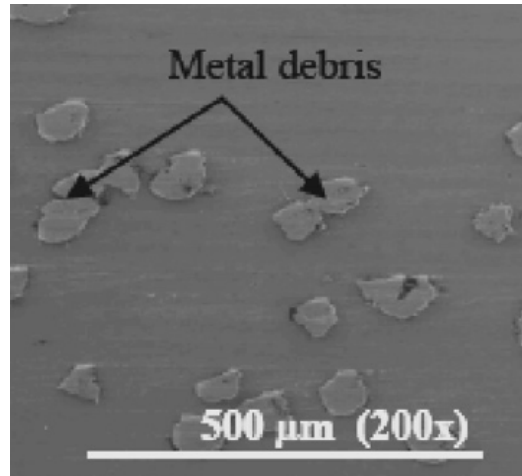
Metal debris on the machined surface after cutting Inconel 718 [11]
